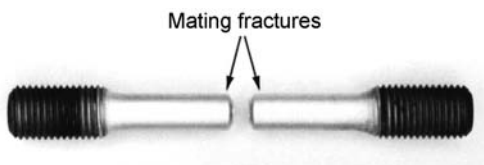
As-received notched tensile specimen showing location of fracture. Tensile specimen was fabricated from 4340 steel, heat treated to 1515 MPa (220 ksi), and chromium plated.
